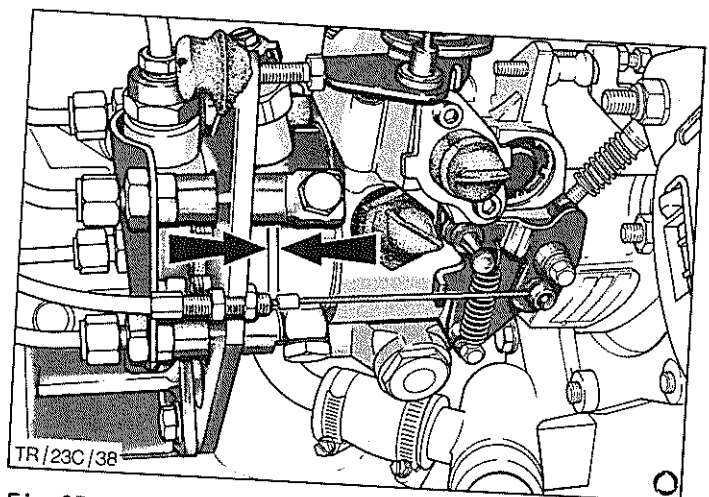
Adjust until a 2 to 3 mm gap between ferrule and end of cable adjuster.
